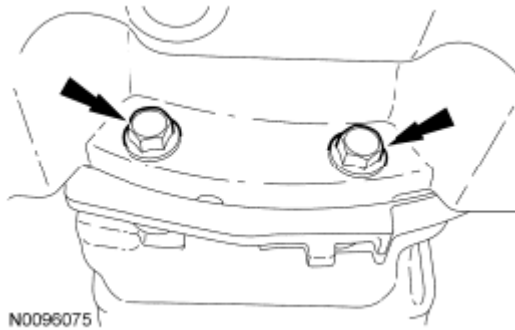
Locating Bellhousing-To-Oil Pan Bolts
